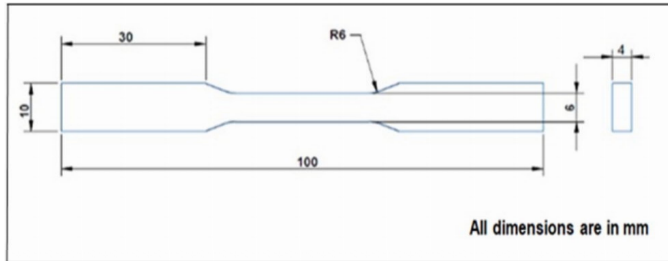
Tensile specimen dimensions as per ASTM-E8 standard
